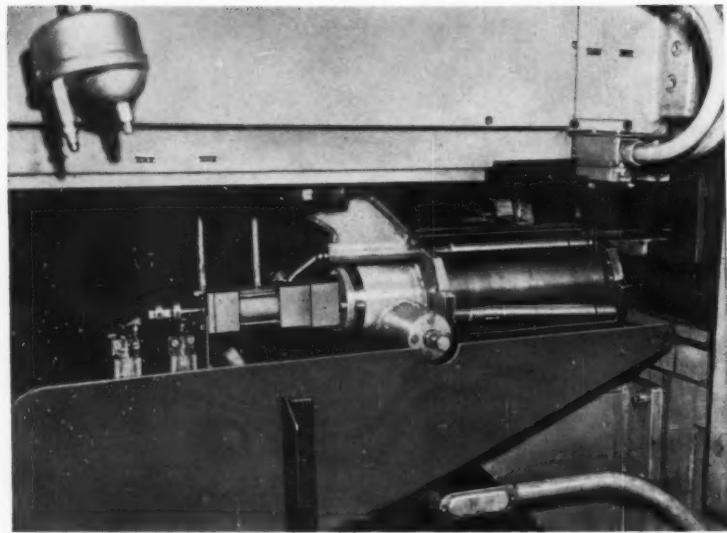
Gear-O-Mation automatic loader with barrel-shaped escapement that takes shafts out of the chute in axial slots. Tailstock is about to load a blank shaft into a Roto-Flo, while a threaded shaft rolls out of the barrel
